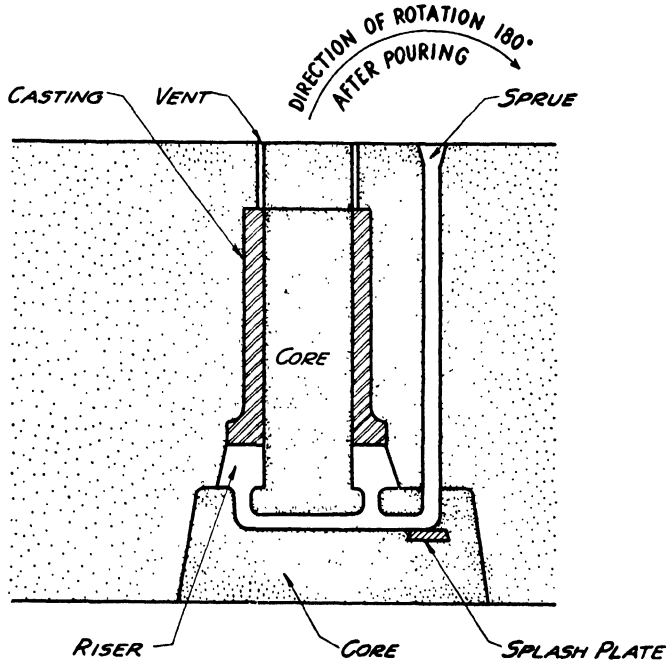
Cross section of a liner casting. Total reversal mold manipulation. (Batty.⁽¹⁷⁾)
